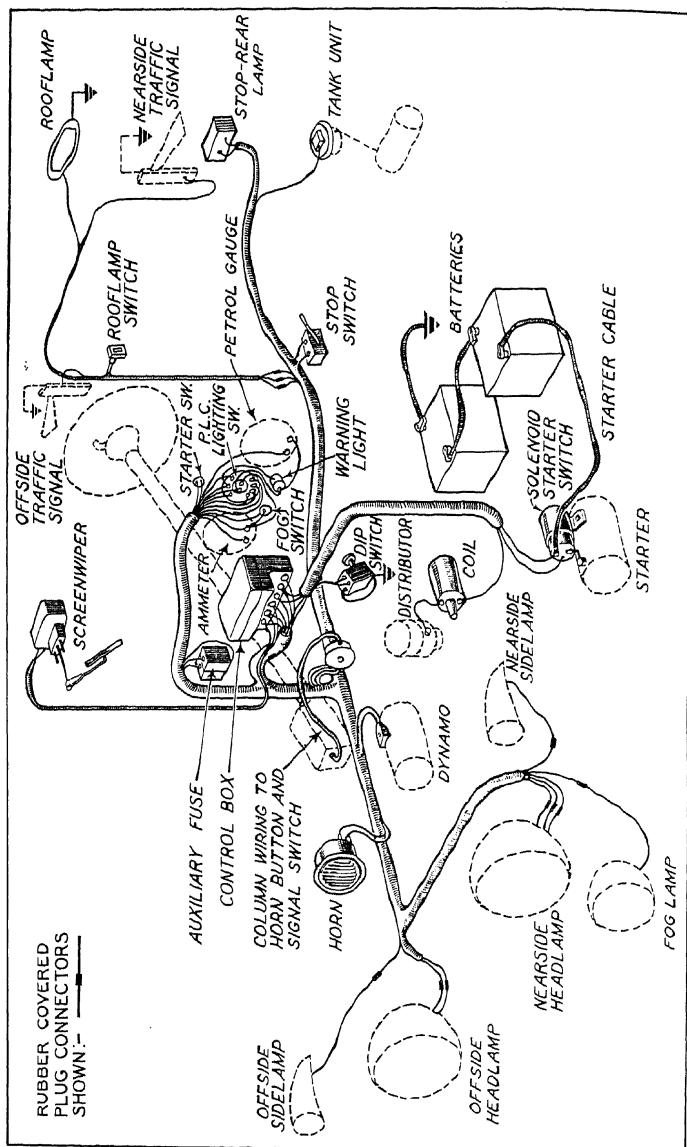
A TYPICAL CAR WIRING LAYOUT
